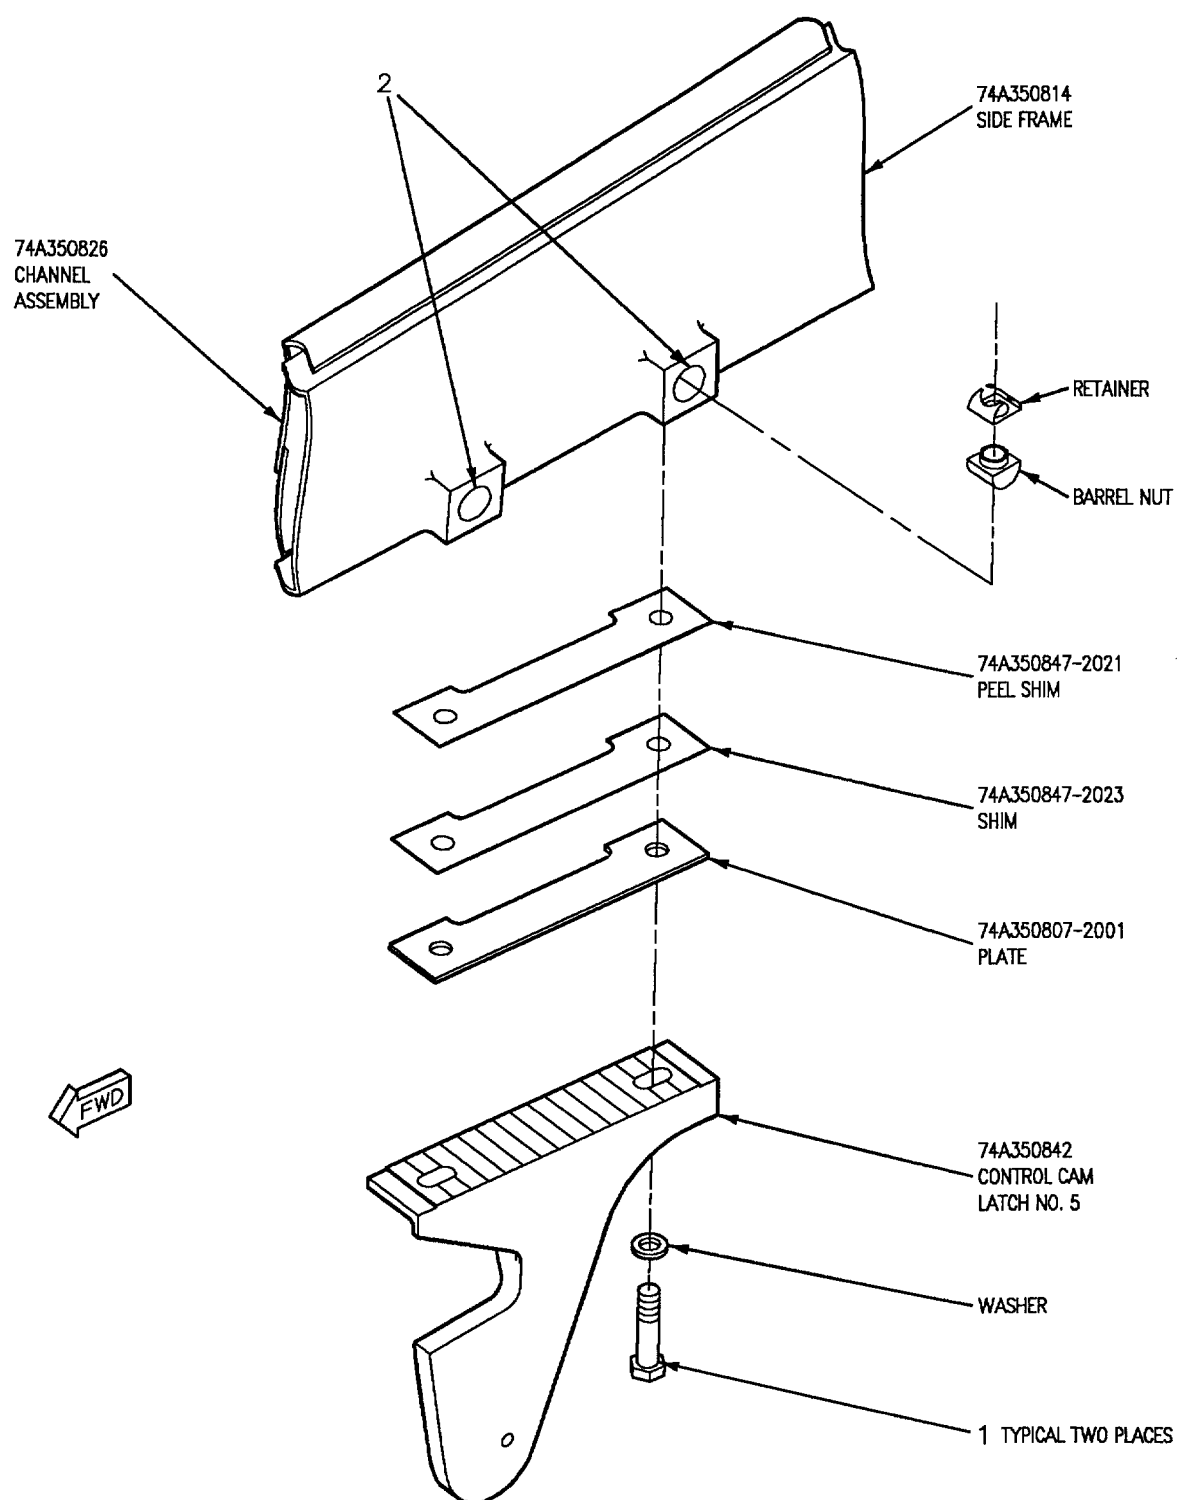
Control Cam, Latch No. 5, 74A350842, Fastener Index (Sheet 1)
